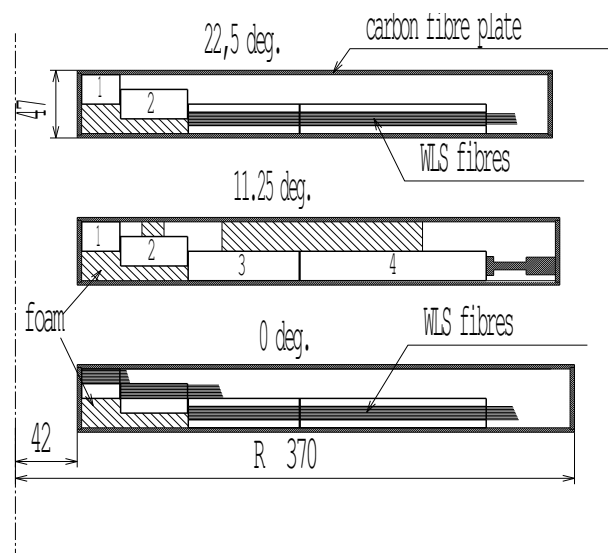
Sector of the V0C array. Actual dimensions of the counters taking into account the constraints for their installation.
